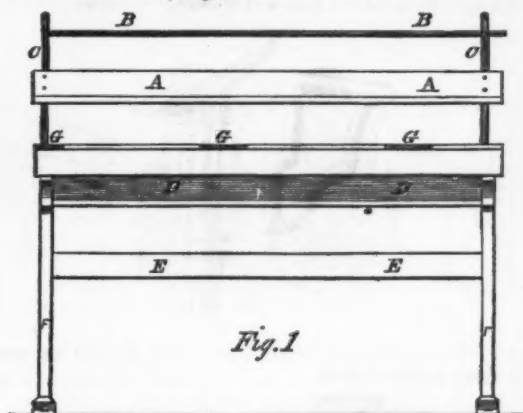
FRONT VIEW OF DRAWING DESK.
